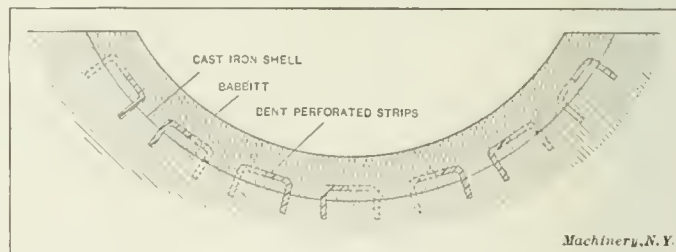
Cross-sectional View of a Bollinckx Babbitted Bearing, showing Construction
